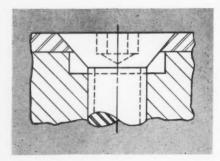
In this instance, the hole in the casting is counterbored instead of being countersunk for the purpose of accommodating imperfect threads under the screw head.
